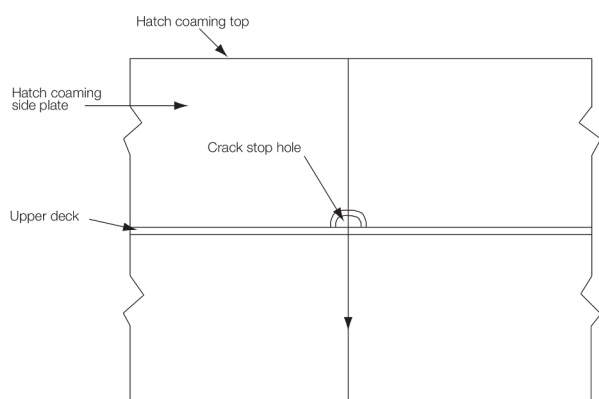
Crack arrest hole in way of the block-to-block butt weld at the region where hatch side coaming weld meets the deck weld
